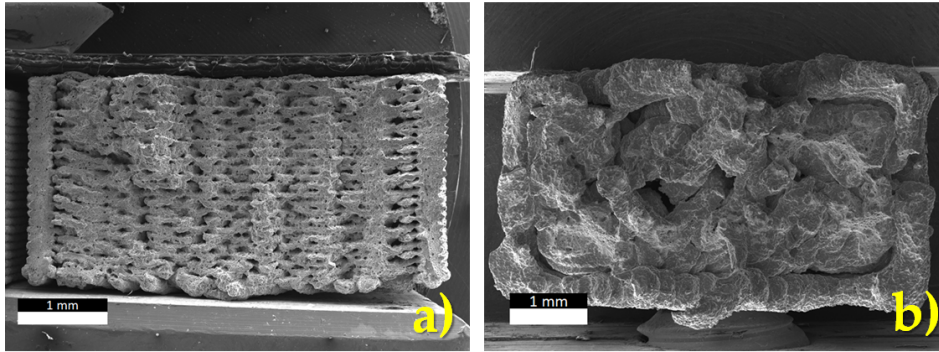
Morphology of the fracture surface of the fractured specimen manufactured using Ultrafuse 316L: (a) flatwise; (b) upright.
